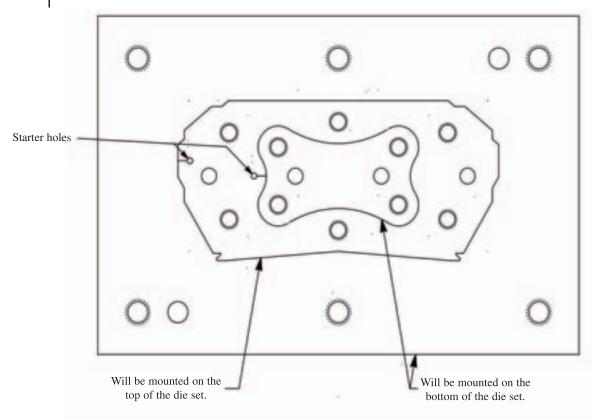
16 Prepare Tool Steel Die Section Put in all desired holes before hardening.
